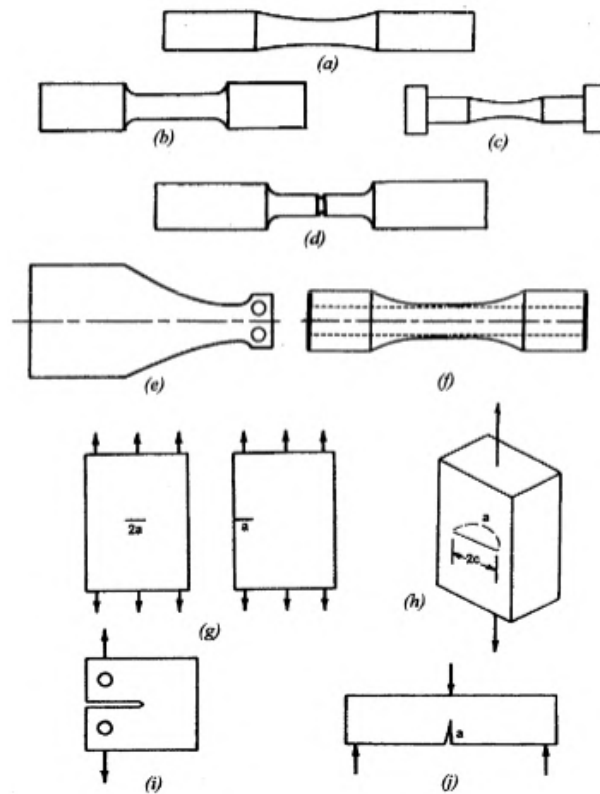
Fatigue testing specimens: (a) Rotating bending; (b) Axial uniform; (c) Axial hourglass; (d) Axial or bending with circumferential groove; (e) Cantilever flat sheet/plate; (f) Tubular combined axial/torsion with or without internal/external pressure; (g) Axial cracked sheet/plate; (h) part-through crack; (i) Compact tension; (j) Three-point bending [57].
